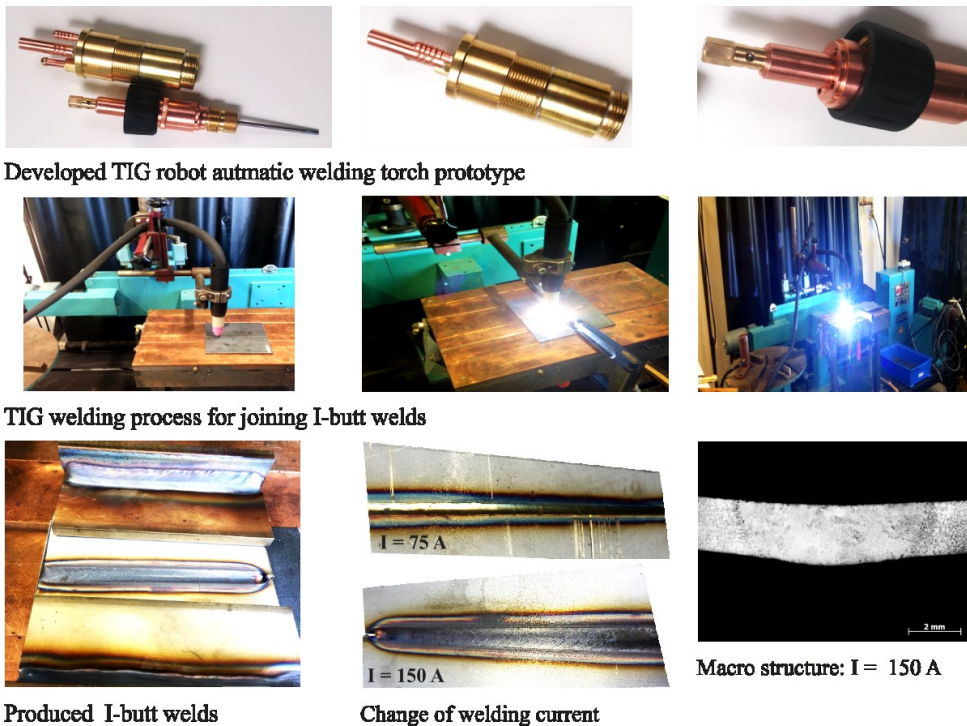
Developed automatic robotic TIG welding torch prototype
